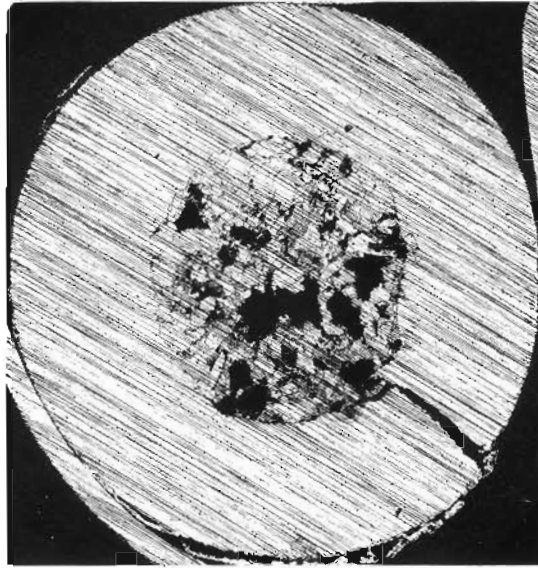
Cross-sectional photograph of TW8544 filler metal
